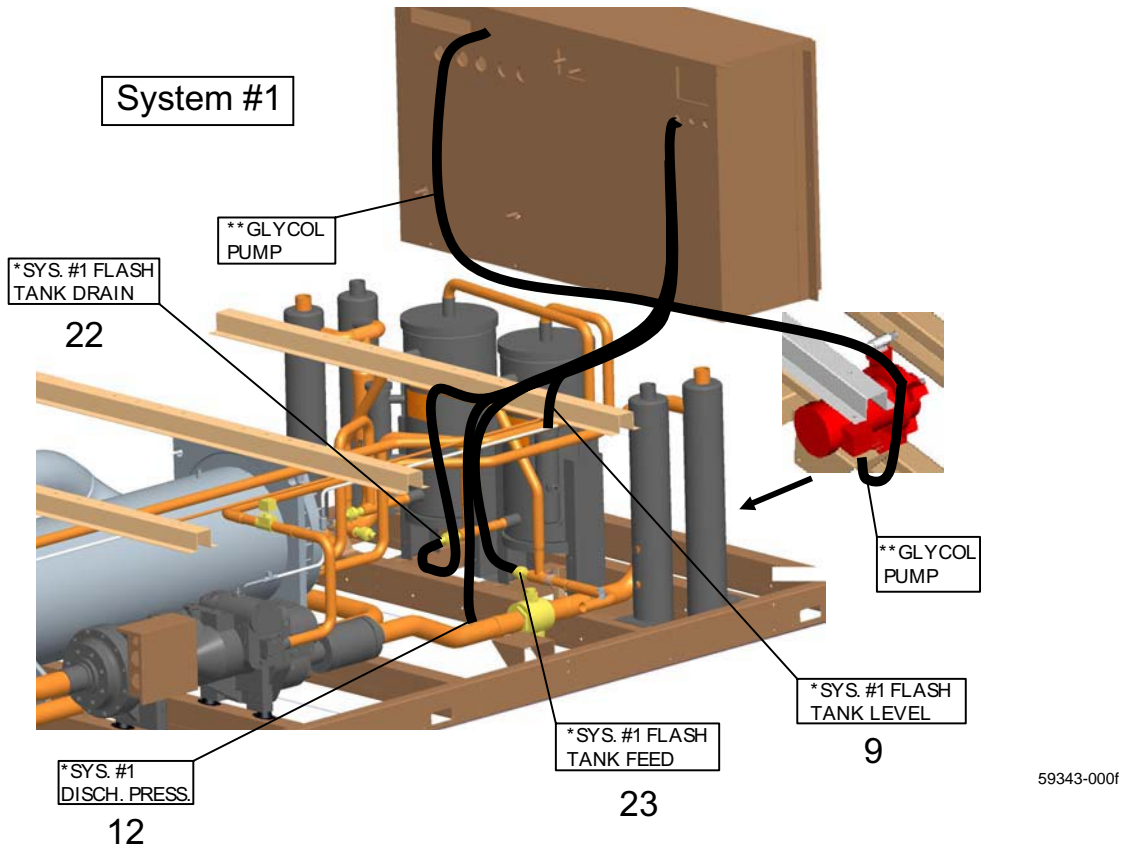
PLUG / JUMPER ARRANGEMENT (REF. TABLE 11, PAGE 55)
